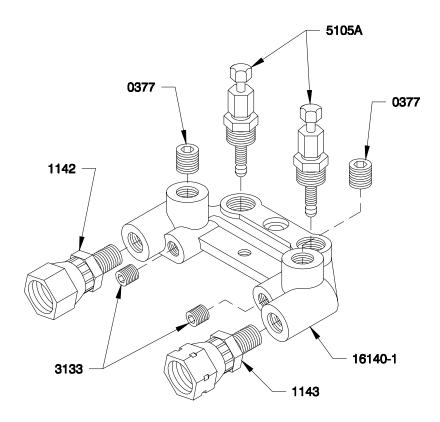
Coupling Block Assembly (Part No. 16140), Exploded View
